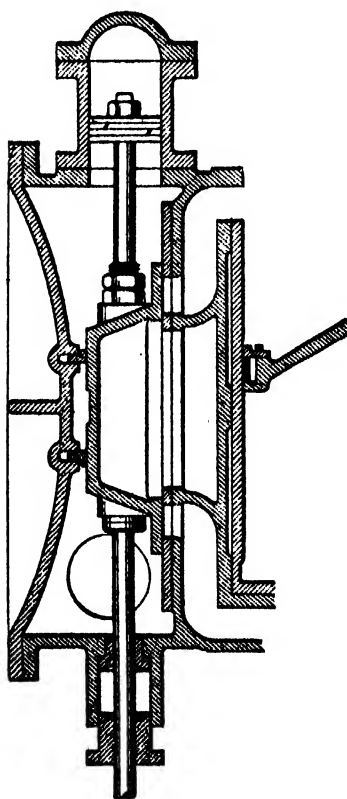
Slide Valve with Balance Piston and Relief Frame
